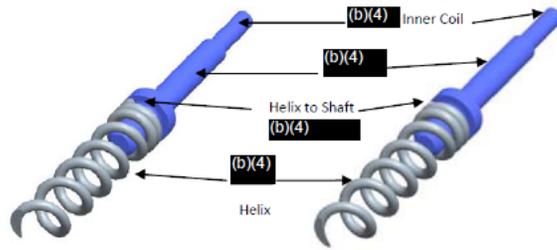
1488 Helix-Shaft Assembly and Proposed Helix-Shaft Assembly
